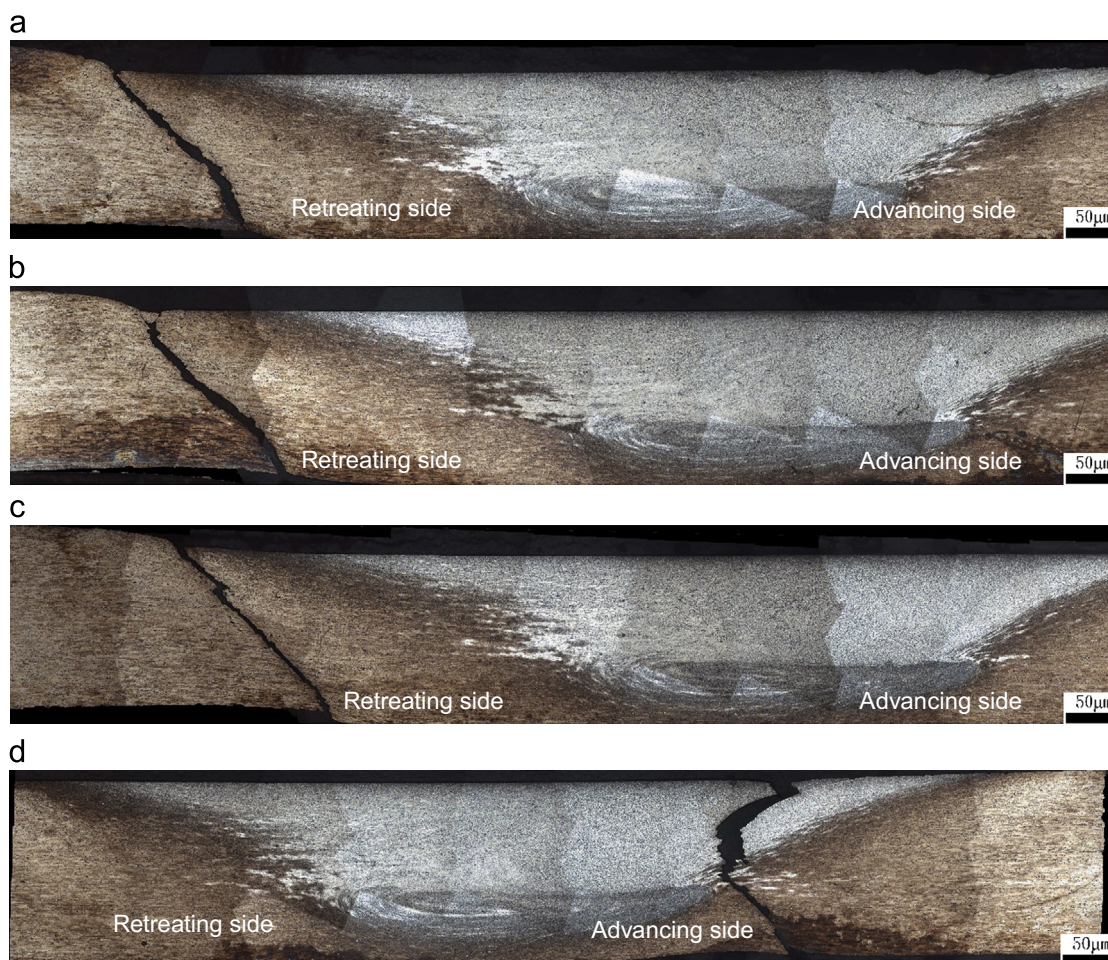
Fracture locations of the tensile samples for the as-welded joint (a), and joints with DCT (b), DCA (c) and LTA (d).
